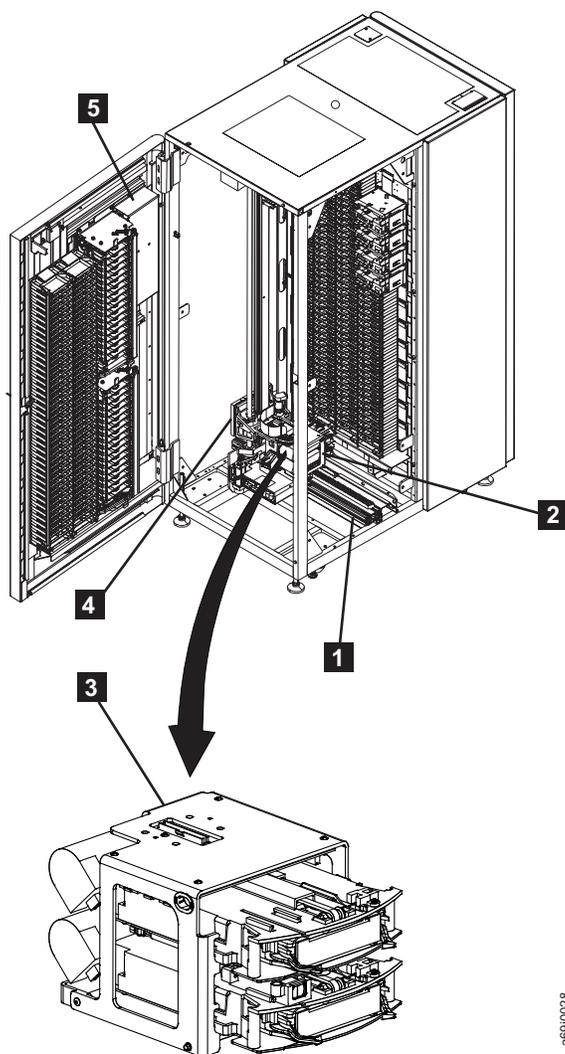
Technical components of the that are accessible through the front door. A Model L52 frame is shown.
